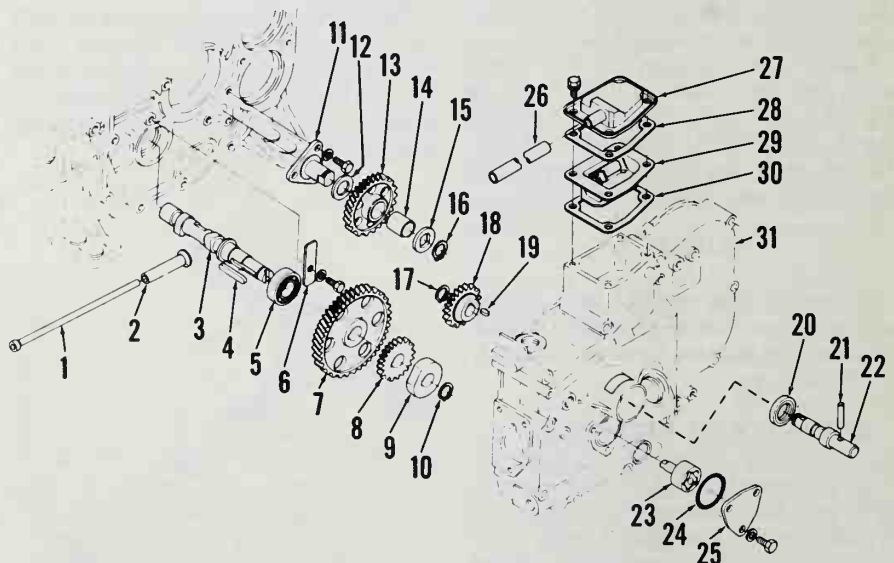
Exploded view of camshaft, idler and oil pump assemblies.
